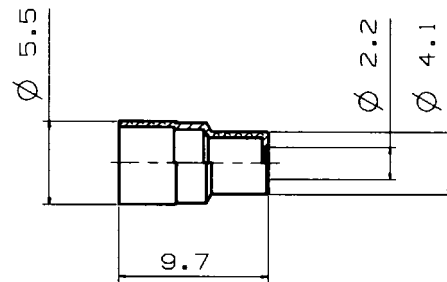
#2-2 Crimping ring (for $\varnothing 2.0$ mm cord)
